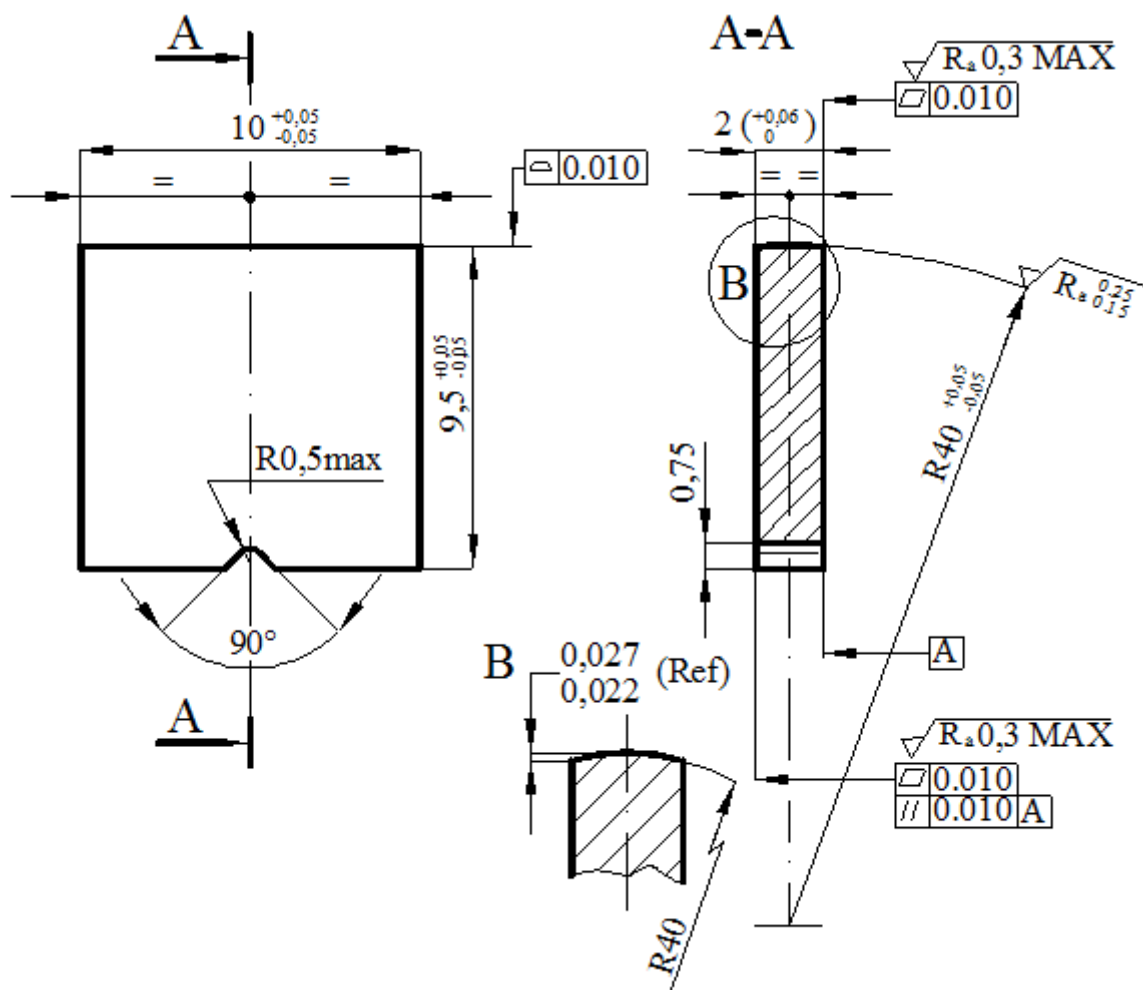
AISI 52100 steel specimen (all dimensions in mm).
